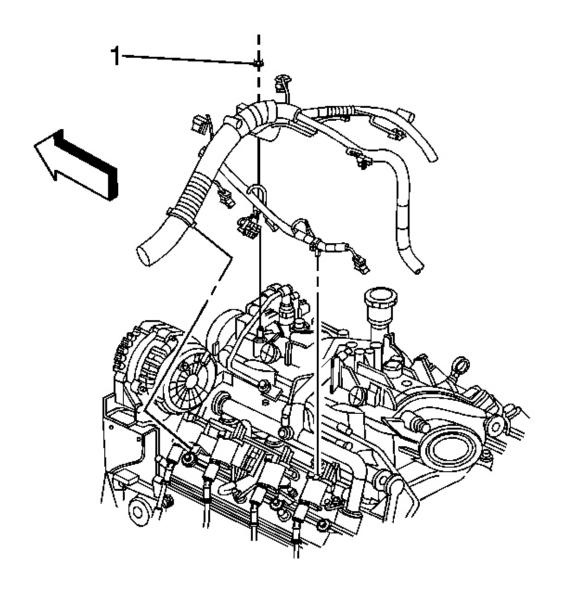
View Of Upper Engine Wire Harness Retainer Nut Courtesy of GENERAL MOTORS CORP.
